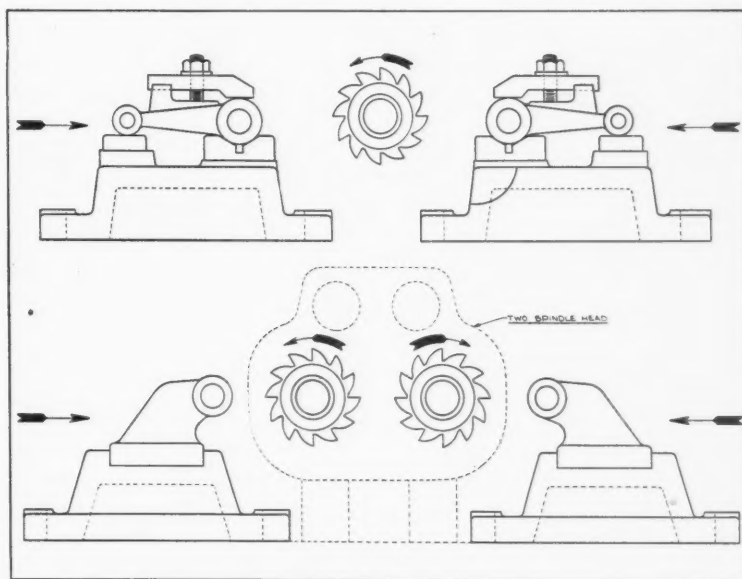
Diagrams Illustrating Single- and Double-spindle Set-ups for Reciprocating Milling
